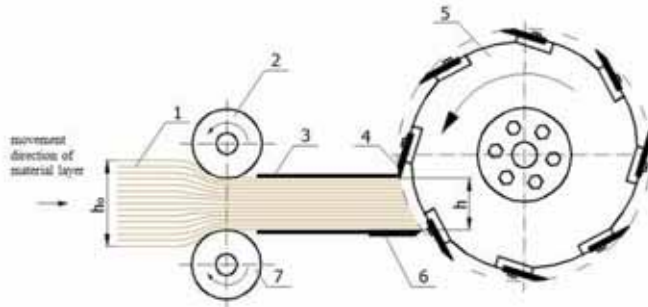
The vegetable material feeding and cutting process using the cutting drum [1]:
